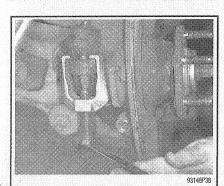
Remove the tie rod from the spindle, using the special tool . . .
